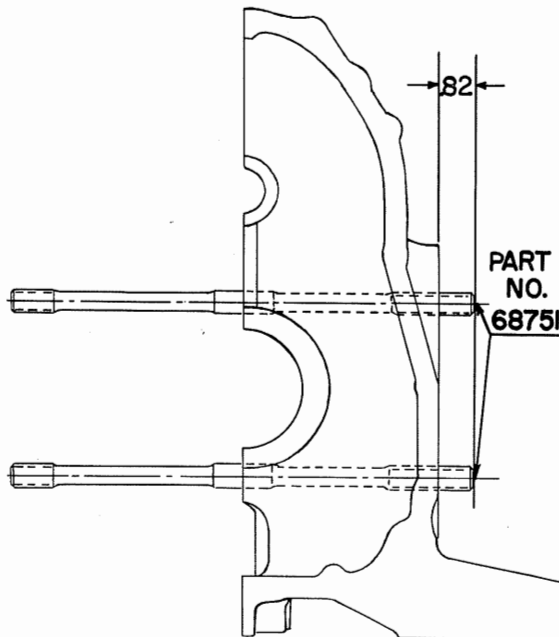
Dimension for Driving Necked Thru-Studs in O-340 Crankcase Half
